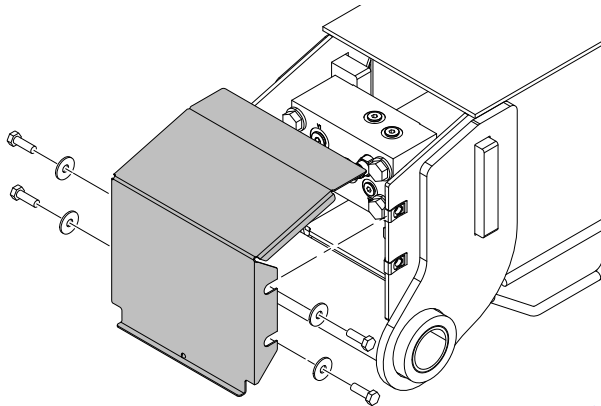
Cables and Clamps Installation - Sheet 8 of 8
